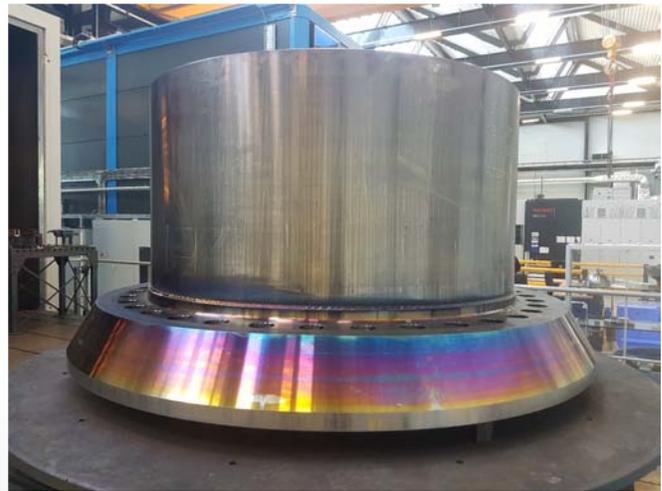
A 2/3-scale diameter (~70 in.) RPV shell-to-flange mockup full-diameter girth weld was completed in 47 min.
